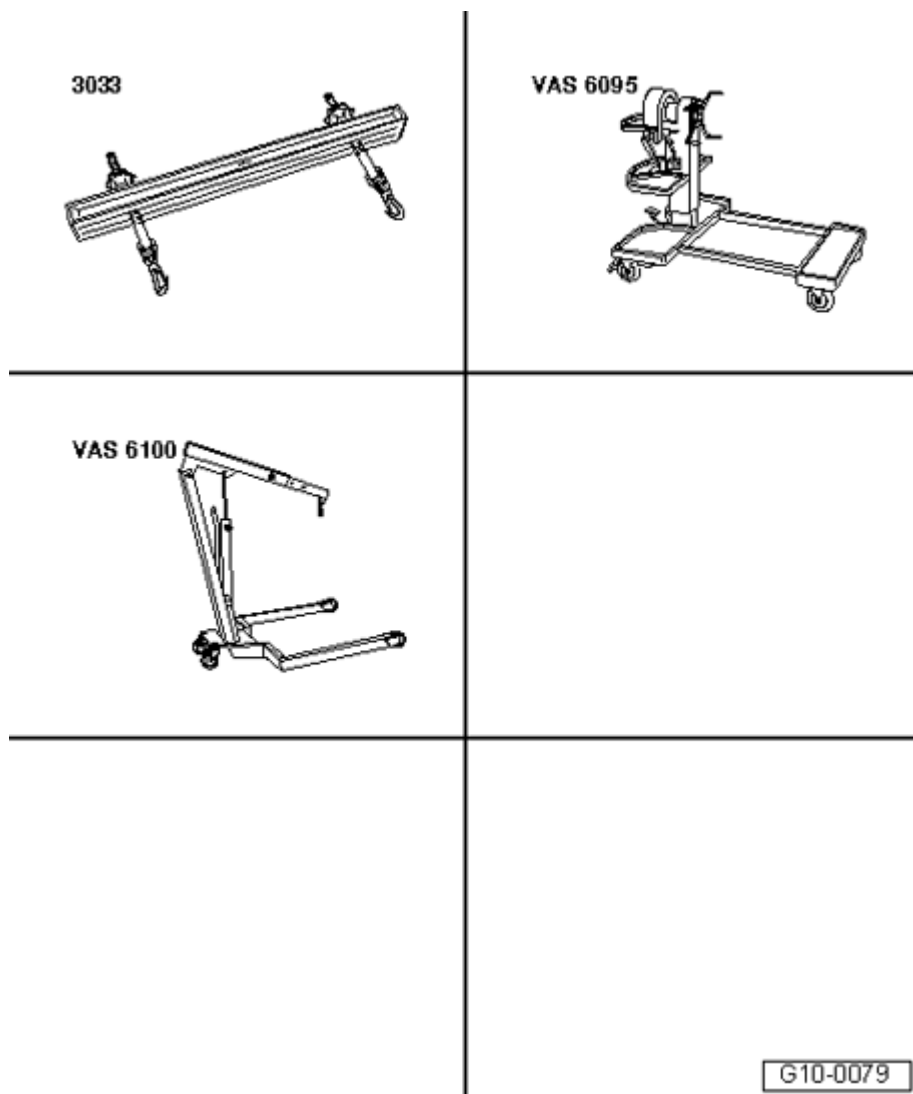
Identifying Special Tools - Engine, Securing To Assembly Stand
